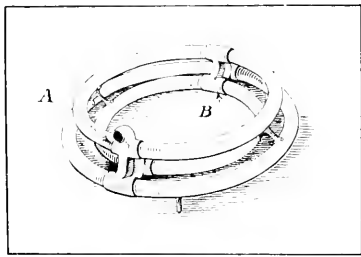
EVAPORATOR COIL OF MODERN DESIGN
